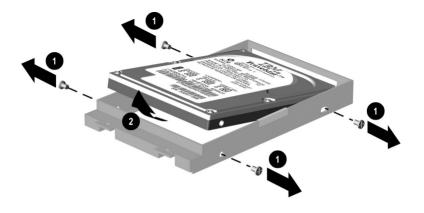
Removing the Hard Drive from the Hard Drive Bracket
